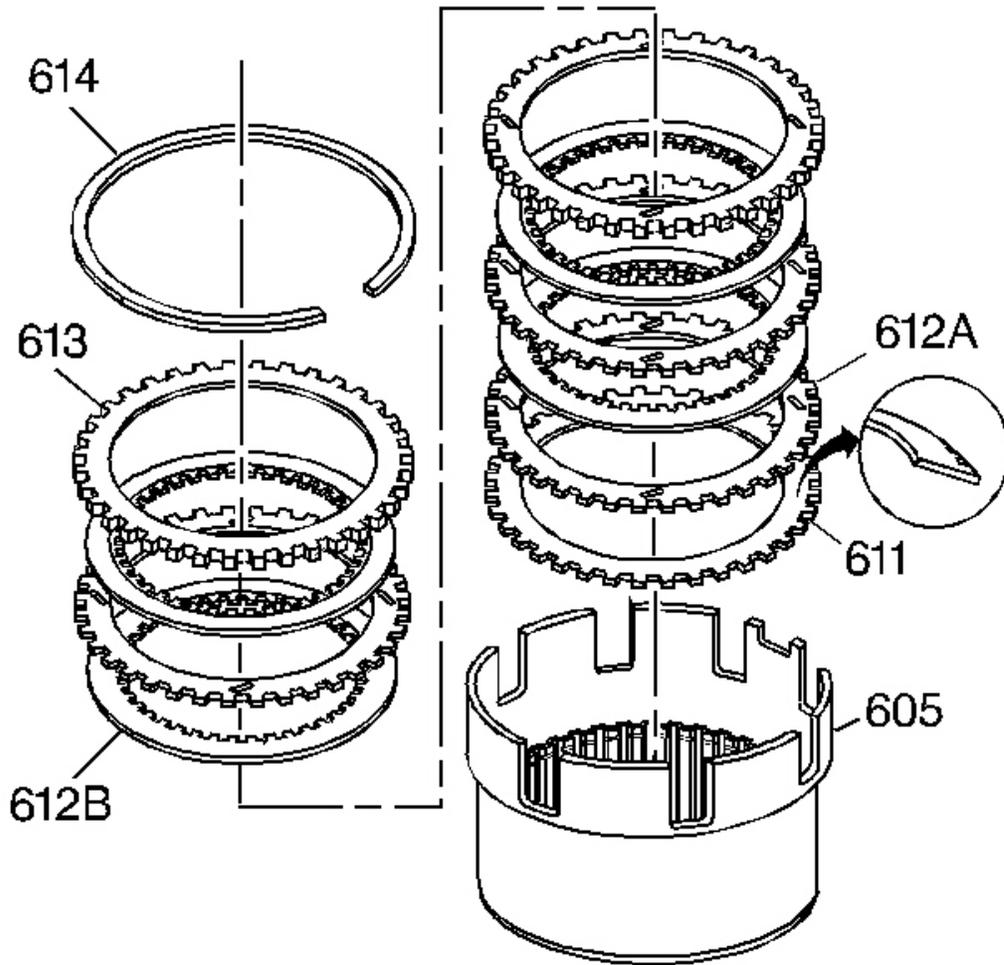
Reverse Input Clutch Retaining Ring & Reverse Input Clutch Plates
